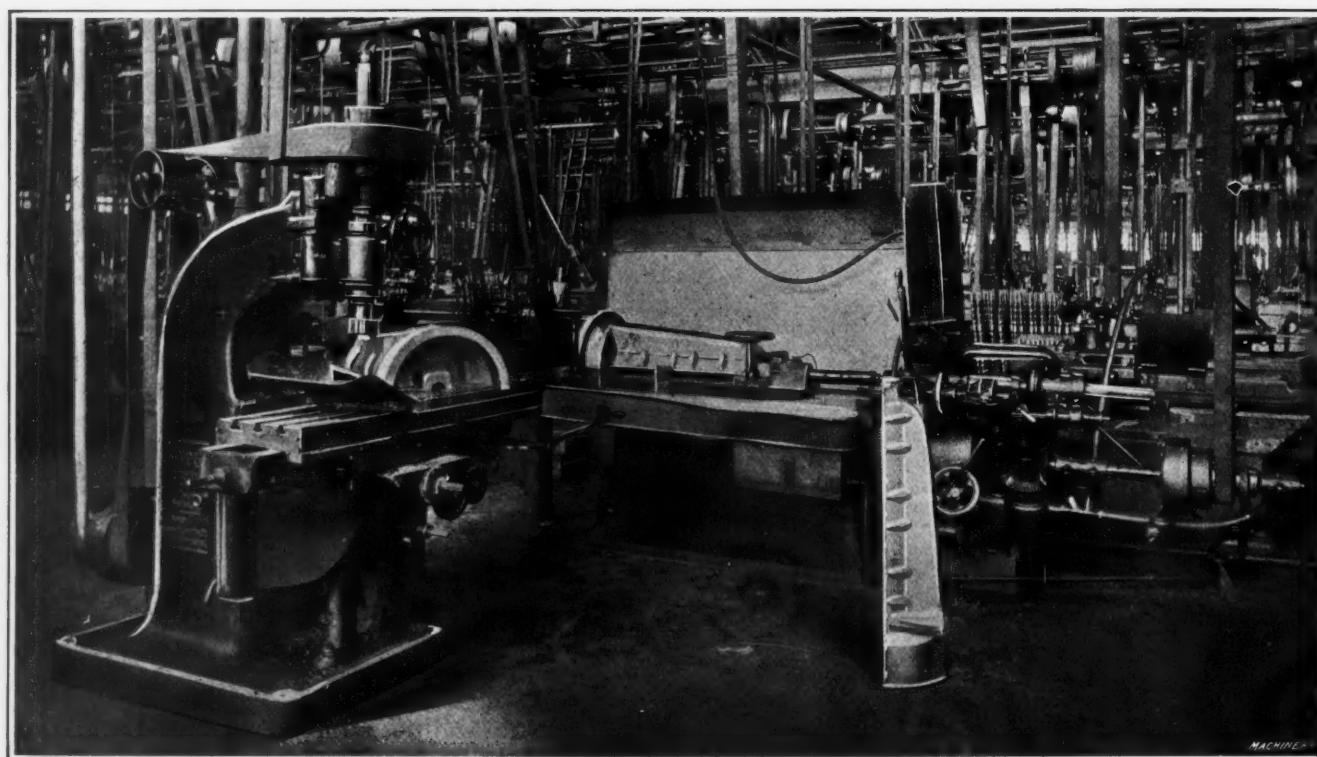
Boring Shaft Bearing and facing off Oil Pump Pad
